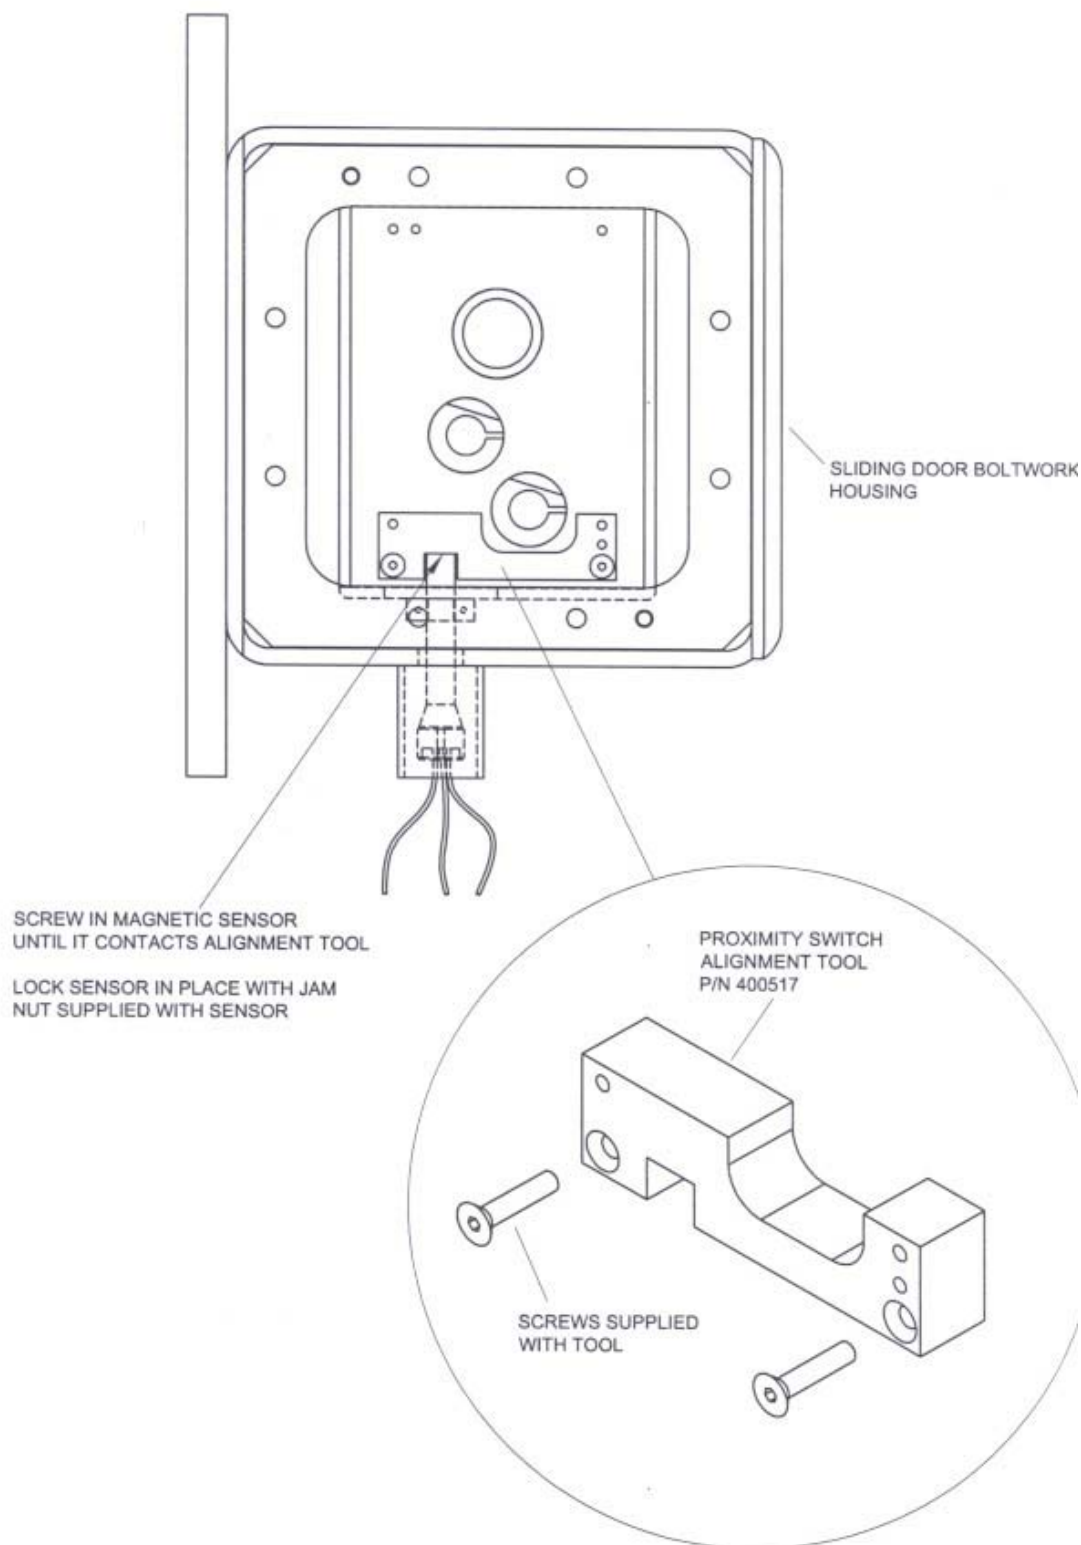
Installation diagram for 3- to 4-inch sliding doors
